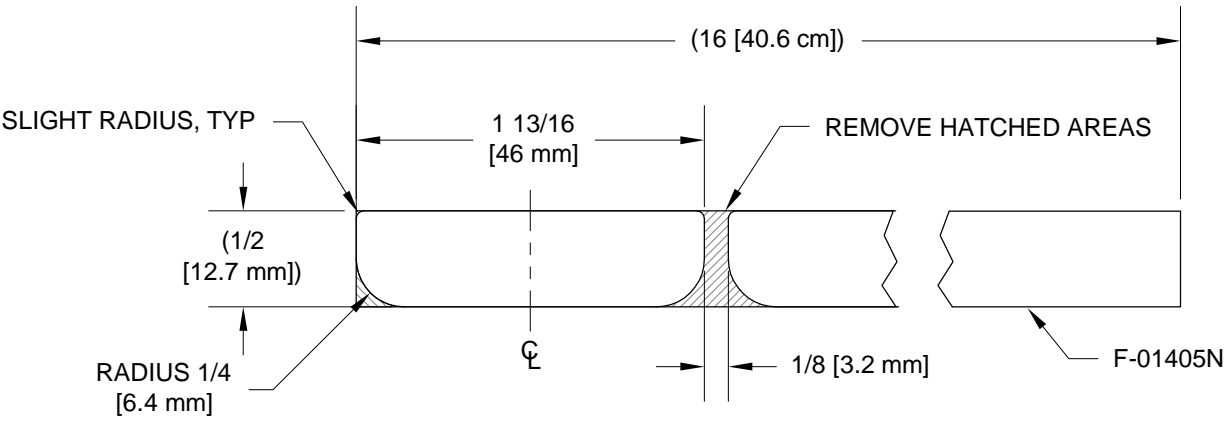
F-01405N SEAT BACK ADJUSTMENT GUIDES
